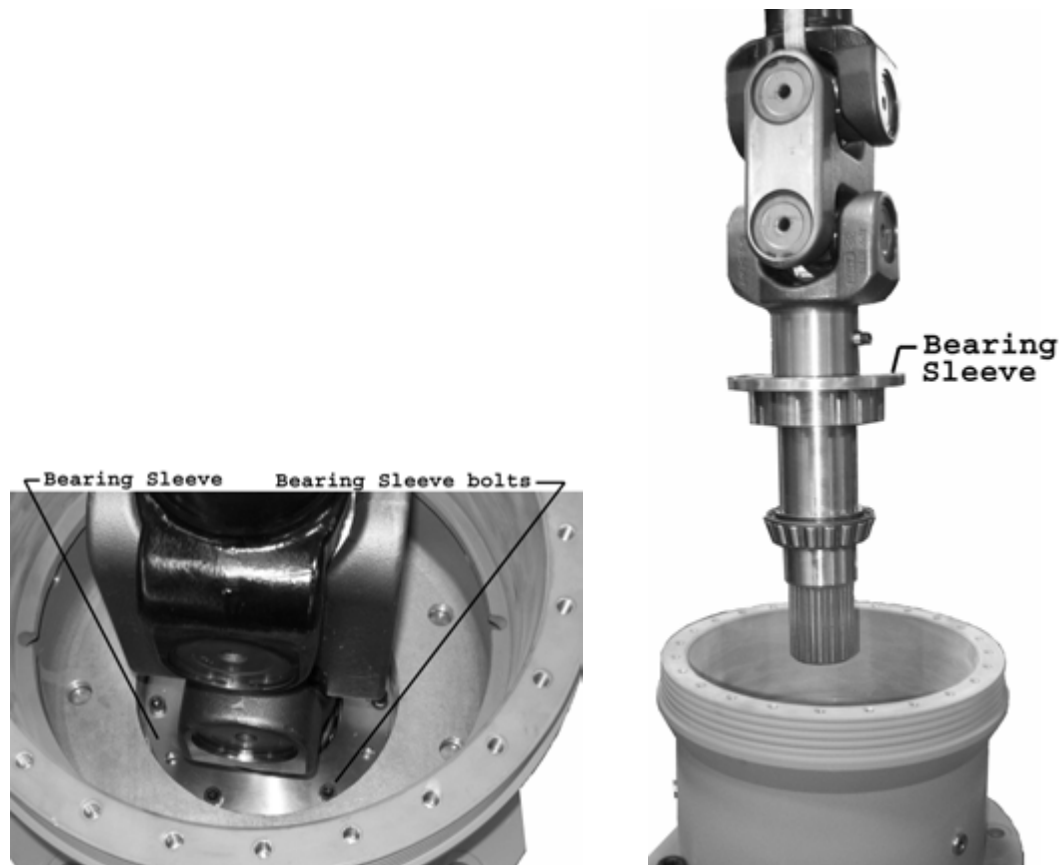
Remove Bearing Sleeve Bolts, Lift Input Shaft Assembly Out of Housing
